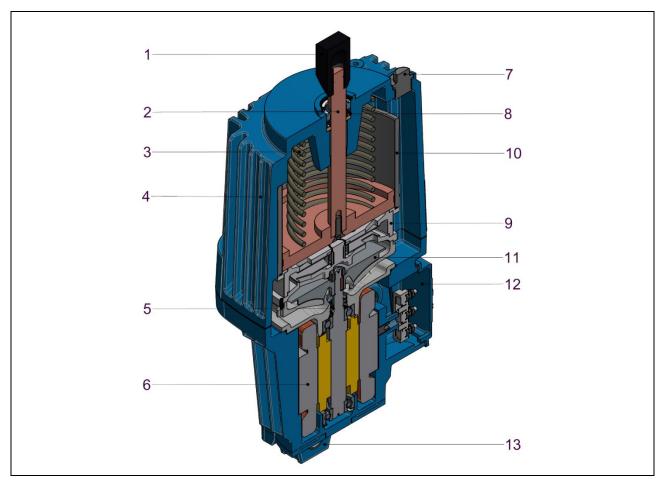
ELDRO® thruster ED500 / ED1250 layout
